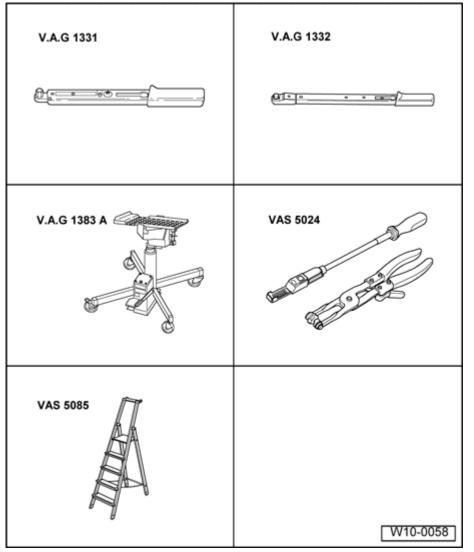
Identifying Special Tools - Engine, Removing And Installing (1 Of 2)
